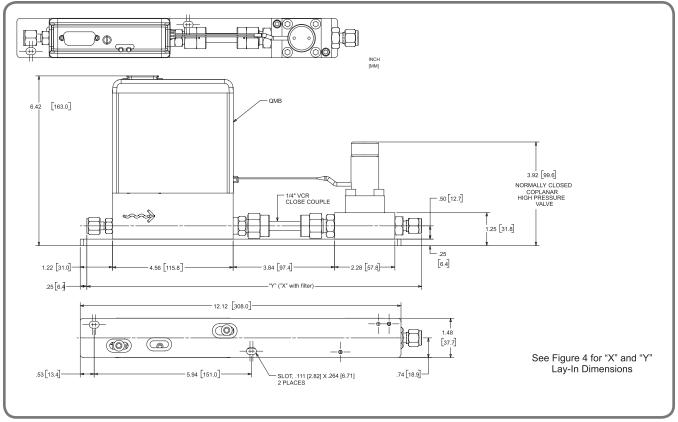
Dimensional Drawing QmB IP40 with Remote Valve
